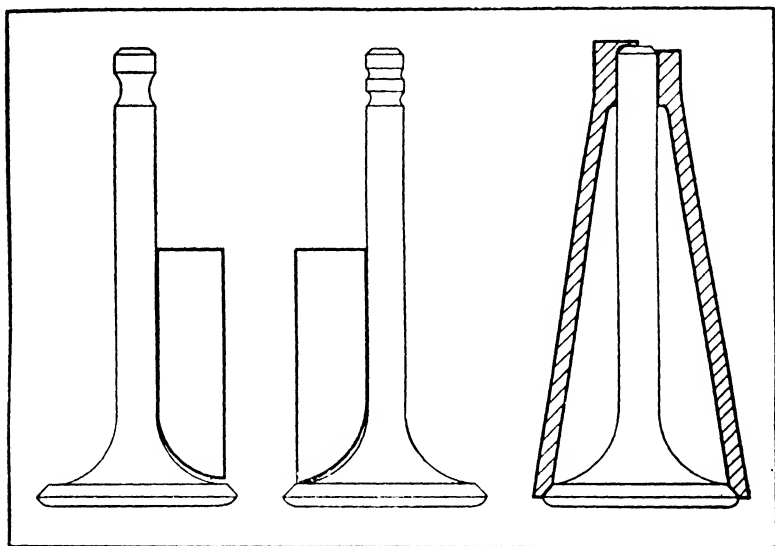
GAUGES FOR CHECKING VALVE STRETCH AND CONTOURS
